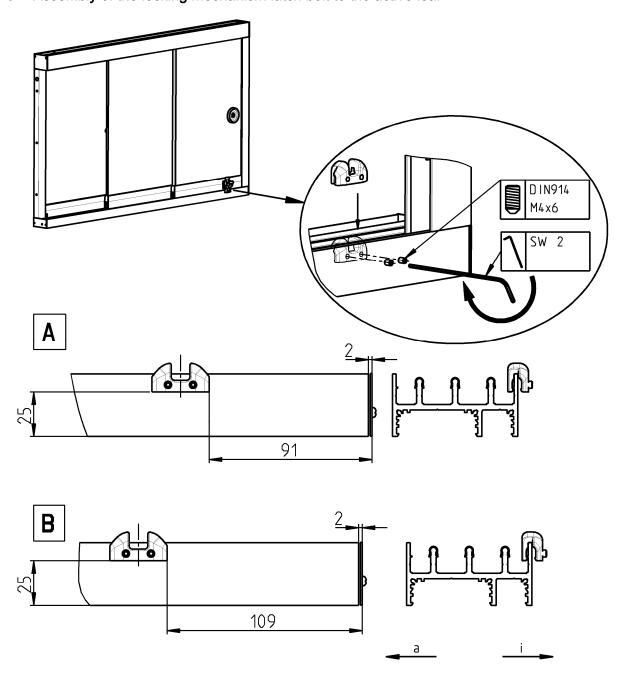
Assembly of the locking mechanism latch bolt to the active leaf
